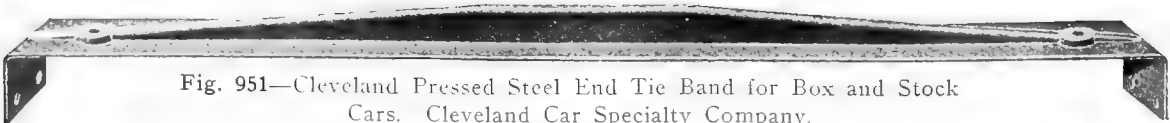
Cleveland Pressed Steel End Tie Band for Box and Stock Cars. Cleveland Car Specialty Company.
